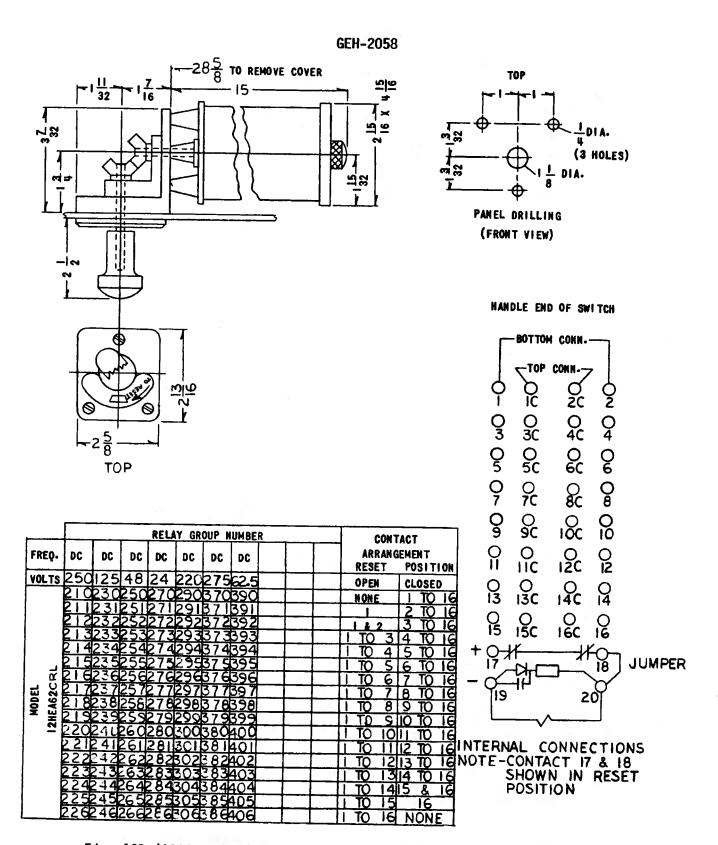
B (0246A2252-1) Outline, Panel Drilling and Internal Connections for Relay HEA62CRL
